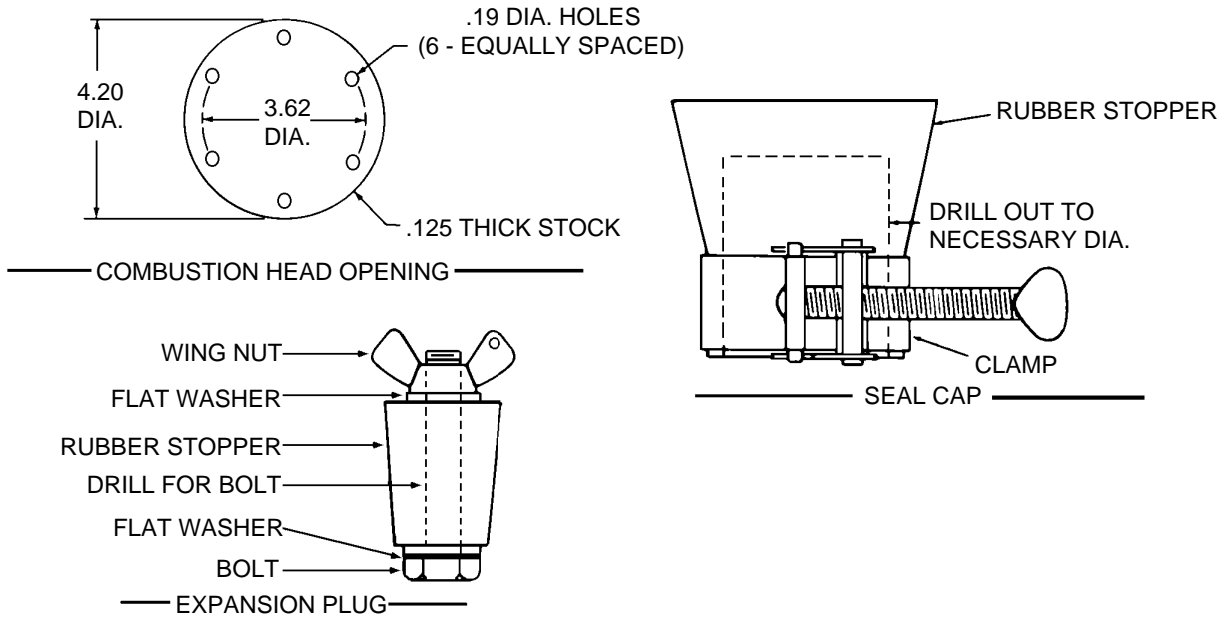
Suggested Design for Seal Plates, Plugs and Caps for Combustion Tube Leakage Test
